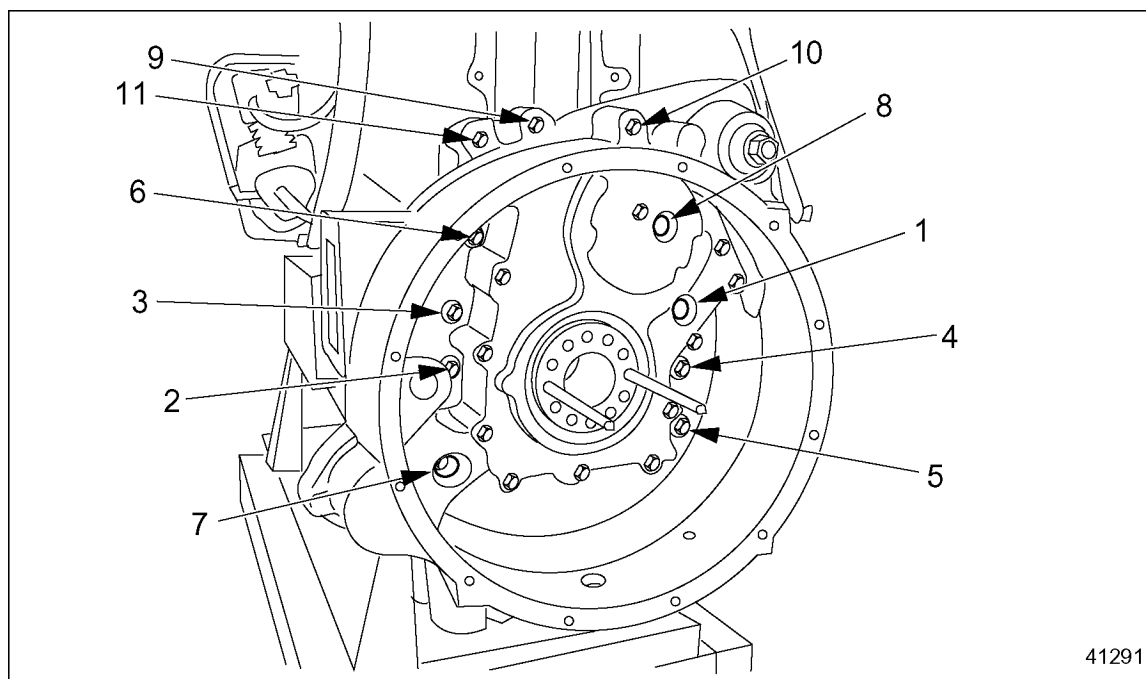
Flywheel Housing Bolt Location and Torque Sequence
